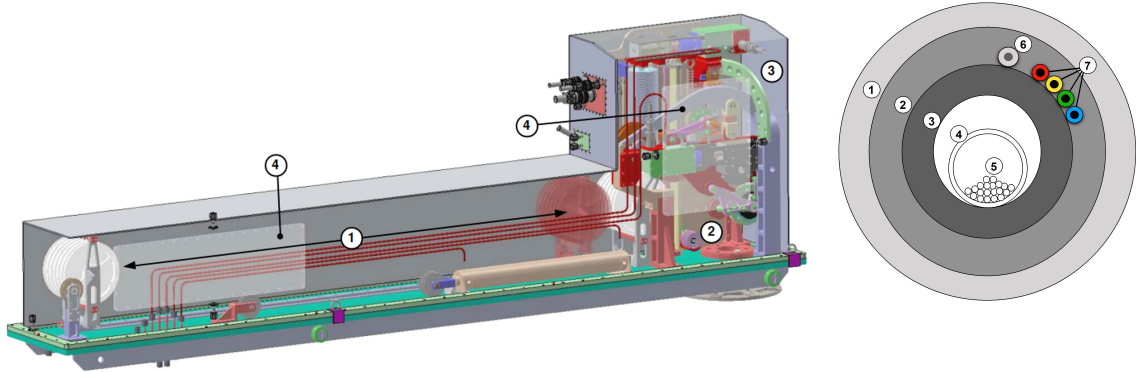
(Left) A cross-sectional illustration of a URM, showing (1) the umbilical storage system, (2) the drive system, (3) the rope mechanism, and (4) an acrylic viewing port for inspections.
